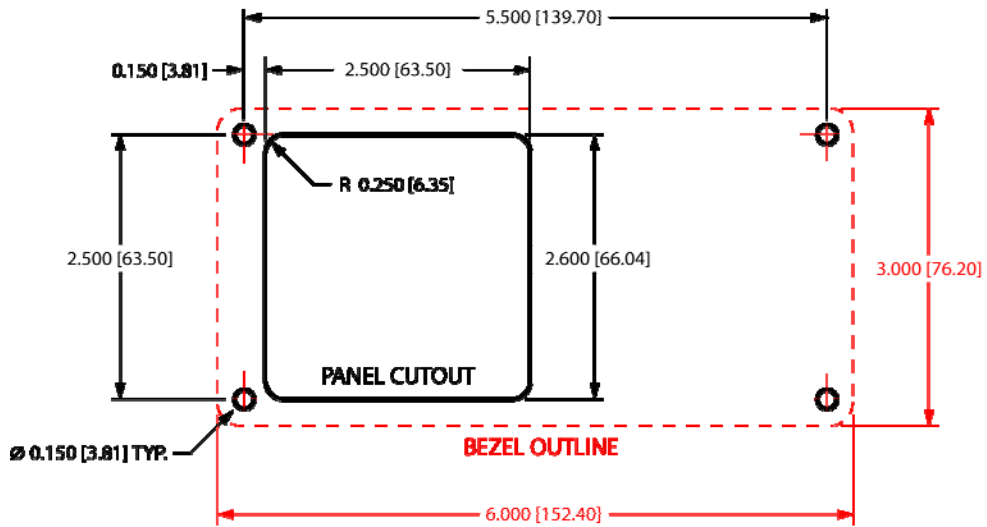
1Touch, 8 position installation dimensions in inches [millimeters].
